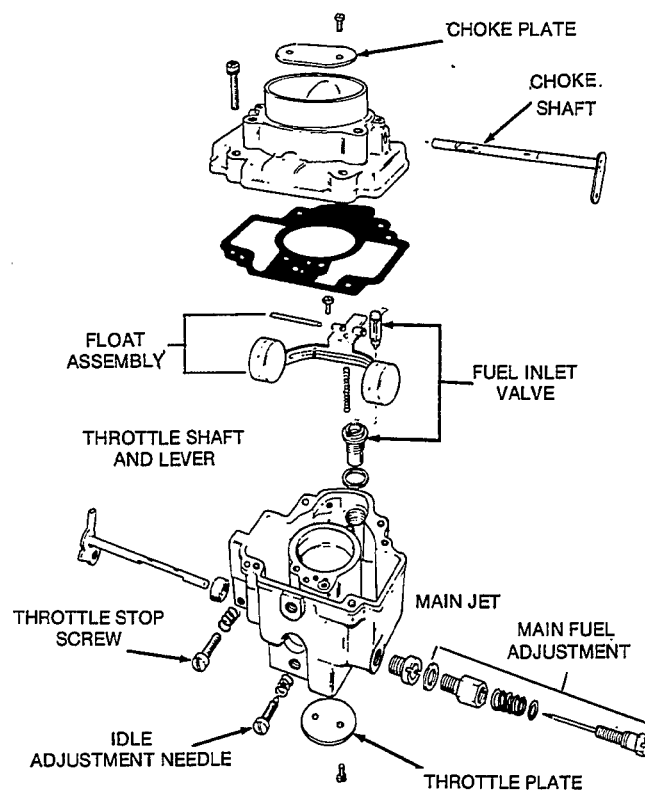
DOWNDRAFT LUA CARBURETOR ASSEMBLY
